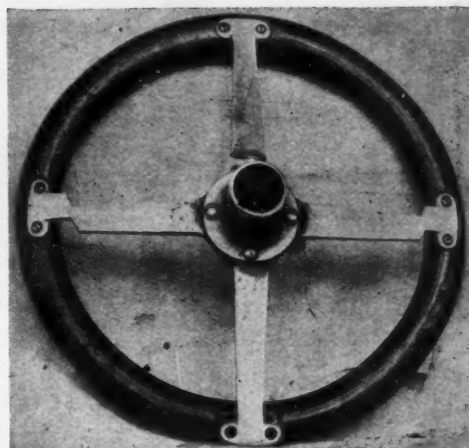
Welding an aluminum steering wheel spider is an easy problem. It is thin cast metal and should be treated accordingly, as described in the section on aluminum. It is interesting to note that the opposite spider has been loosened from the rim of the wheel so as to permit expansion
